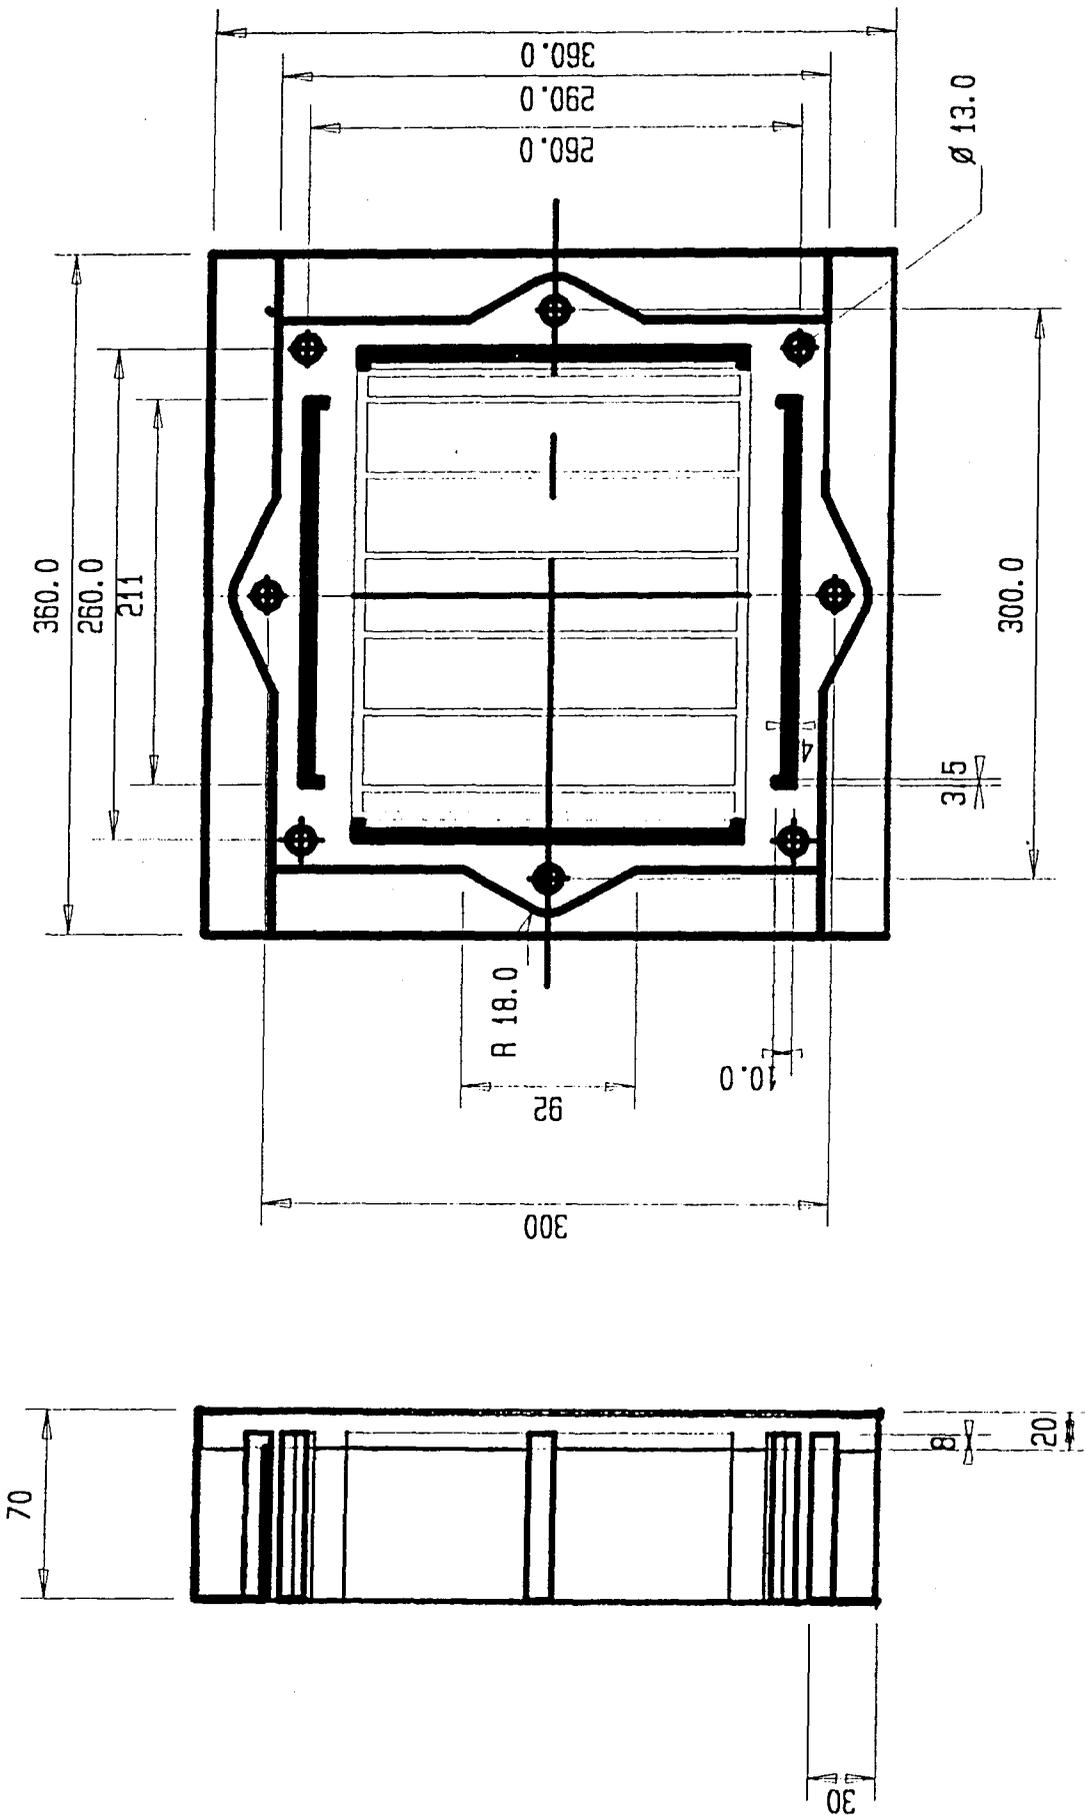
DRAWING OF 8-CLAMPING HOLE ENCAPSULATION MOULD
